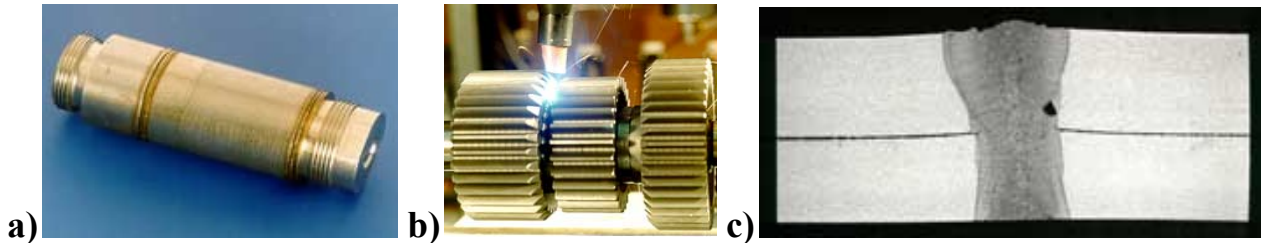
Examples of laser welded products [8]: a) – solenoid body; b) – a block of gears of a transmission; c) – overlapping of a sheet of aluminum alloy 5754 ($\delta=1.6$ mm), welded at a speed of 5 m/min.
